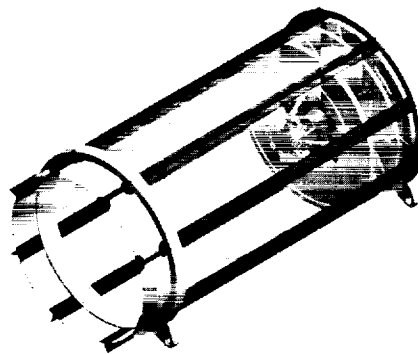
View of the structural module assembly (SMA) containing the secondary concentrator and thermal storage engine. (Several skin panels have been removed for view clarity.)
